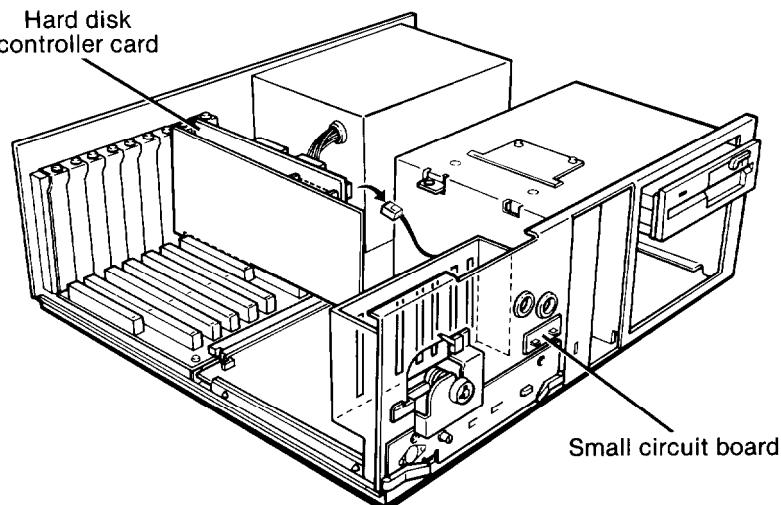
Unplugging connector CN6 from hard disk *controller card
